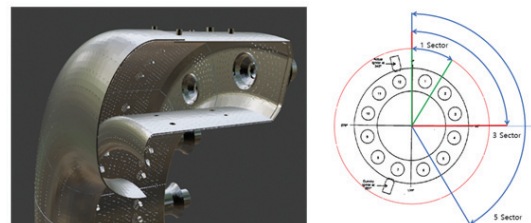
Reversed sector combustor schematic and nozzles layout of combustor.
